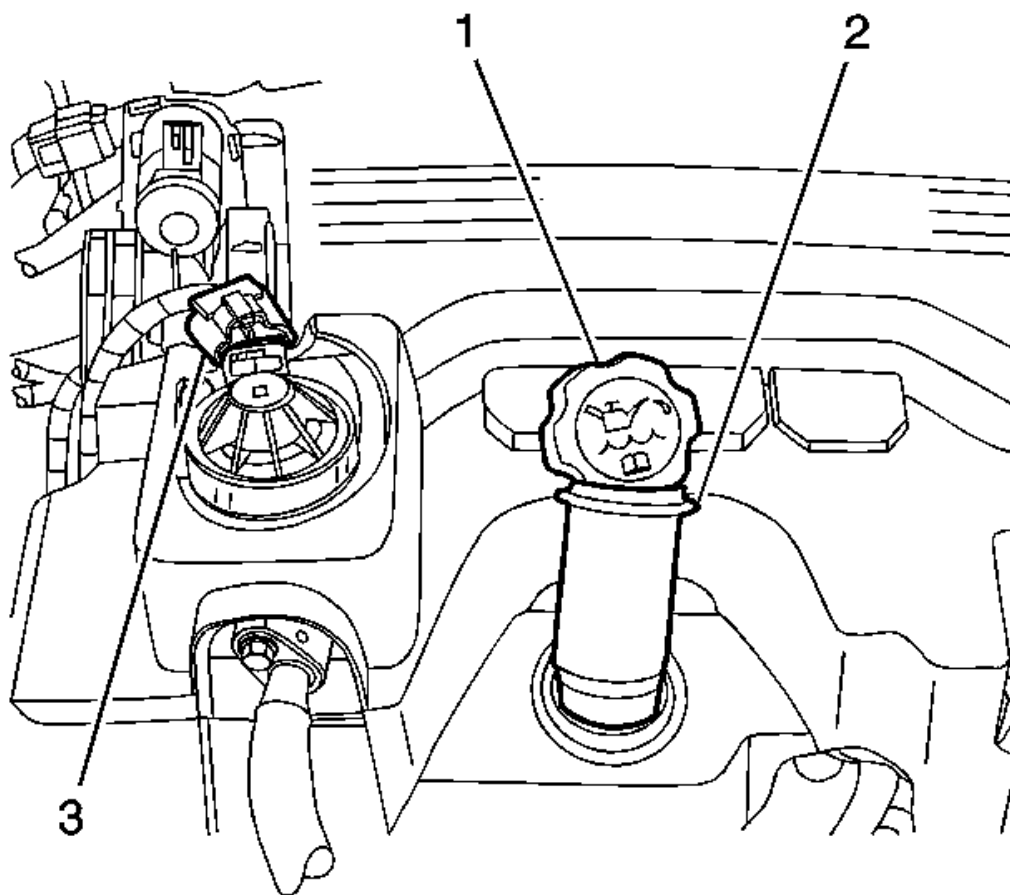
Identifying Oil Filler Tube, Oil Cap & EGR Electrical Connector
